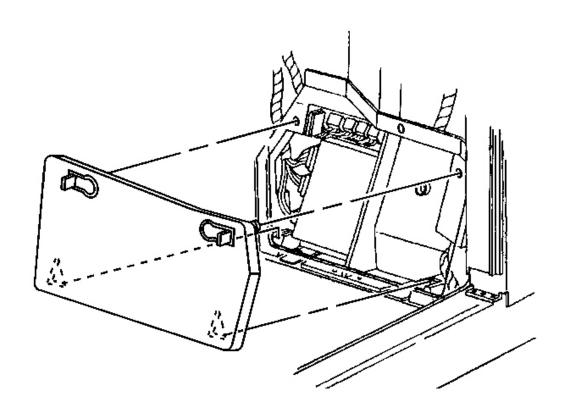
Kick-Up Panel Upper Latches Courtesy of GENERAL MOTORS CORP.
